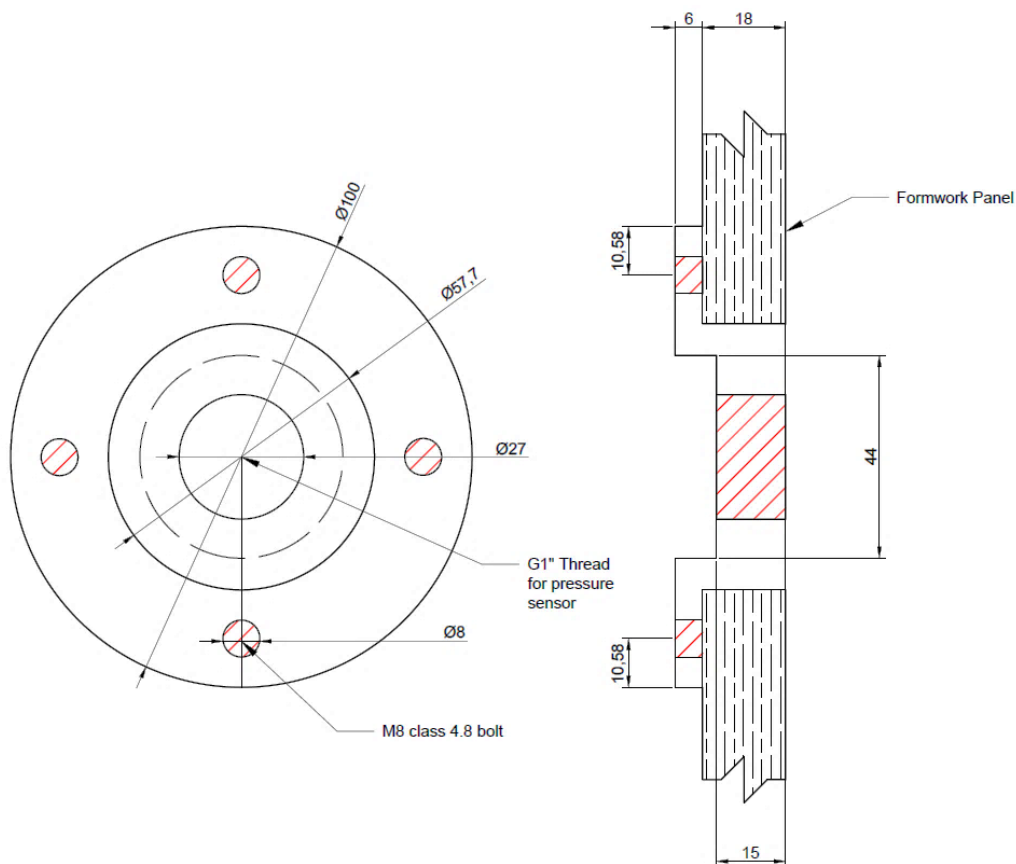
Drawing of the PVC adaptor with dimensions (mm).
